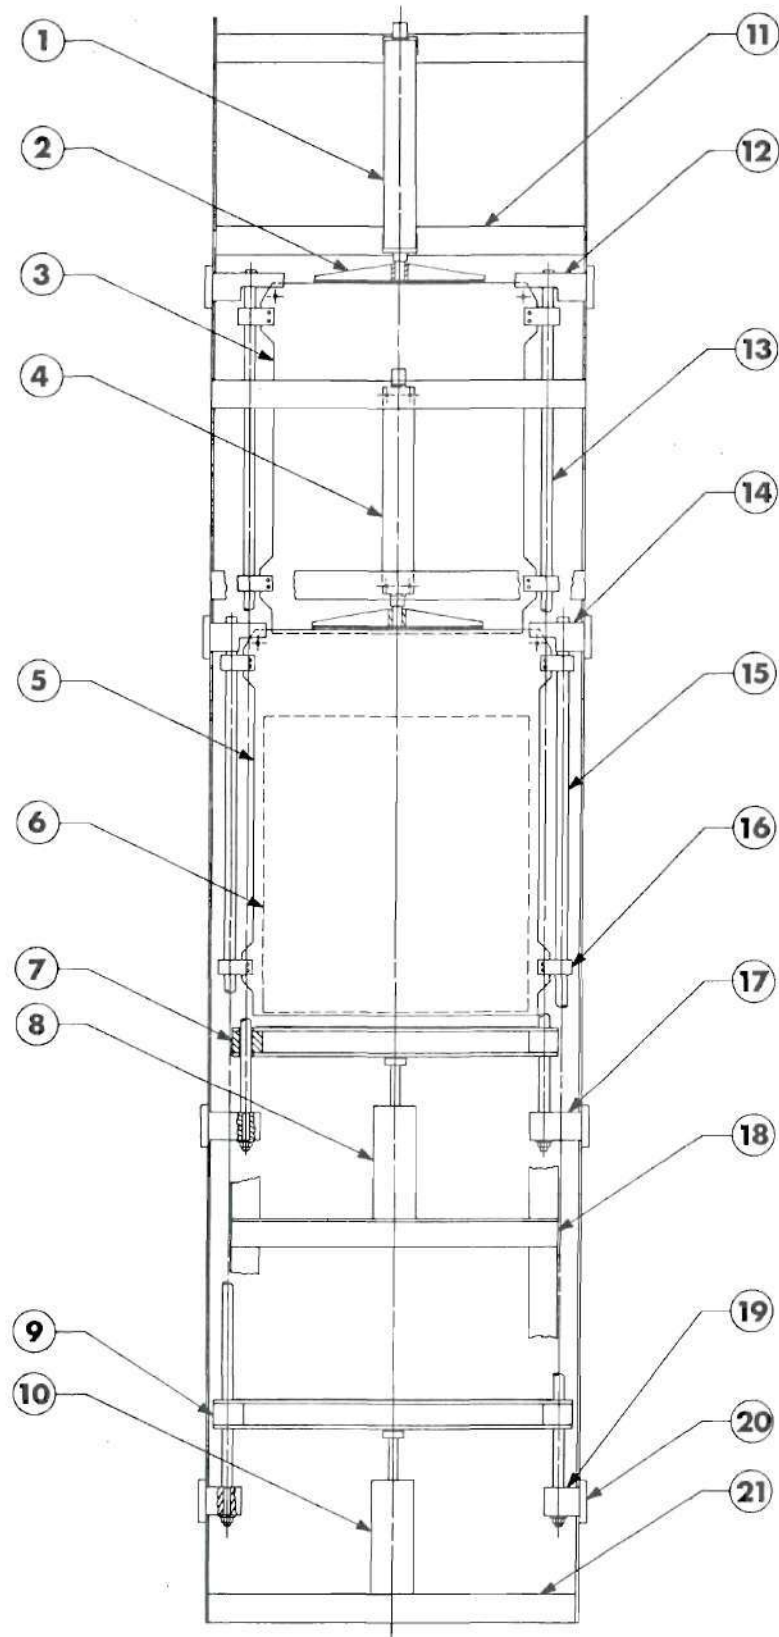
Assembly Drawing of LITA Without the Exhaust Hood, Front View
